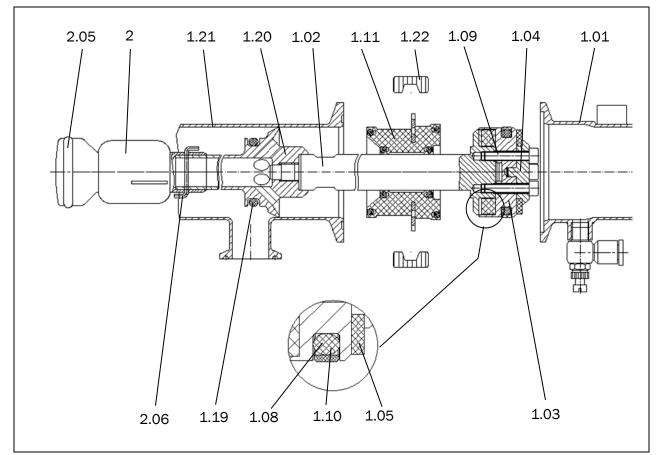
Replacing the O-rings, the central bearing, the piston ring and the damping ring
